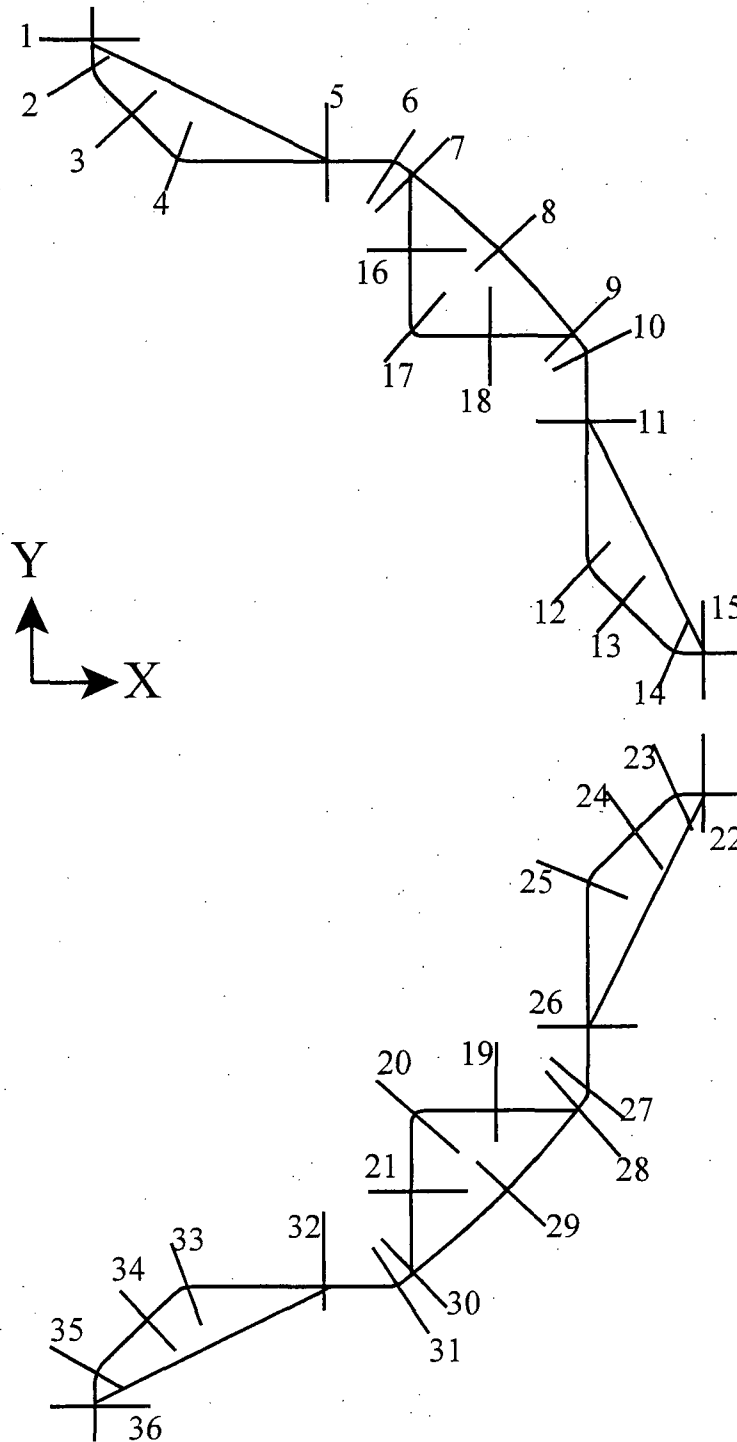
BWR Corner Support Weldment Section Cuts – 45° Basket Orientation
